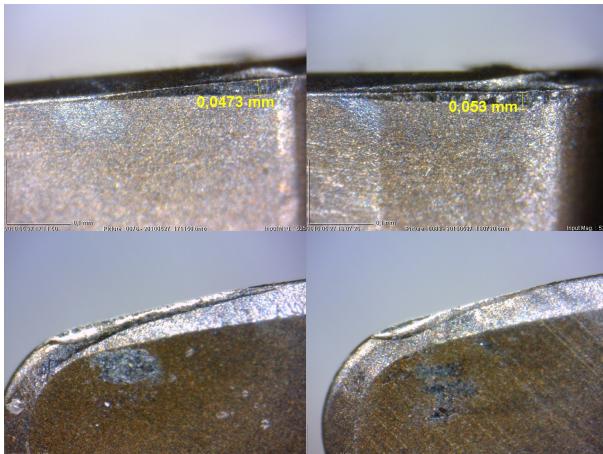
Tool wear on non-modified (left) and modified (right) cutting edge
